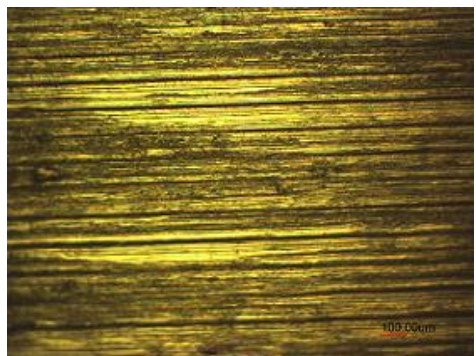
Optical microscope image of the workpiece surface after machining process by micro-texture tool (parallel the cutting edge)
